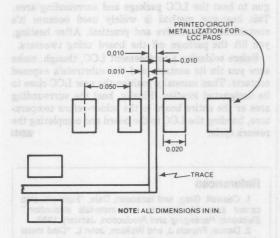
High LCC packaging density calls for tight geometries in board metallization, layout and manufacturing. Typical chip-carrier layouts mandate 0.010-in.wide pc traces, 0.050-in. LCC center spacings and 0.010-in. spaces between traces and LCC mounting-pad metallization.
